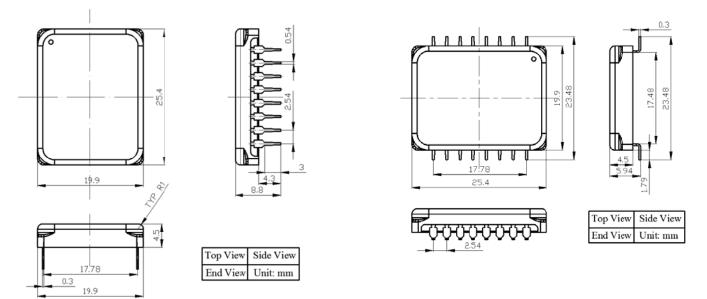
Dimensions of the SMT Package Controller of TECA1-XV-XV-S
